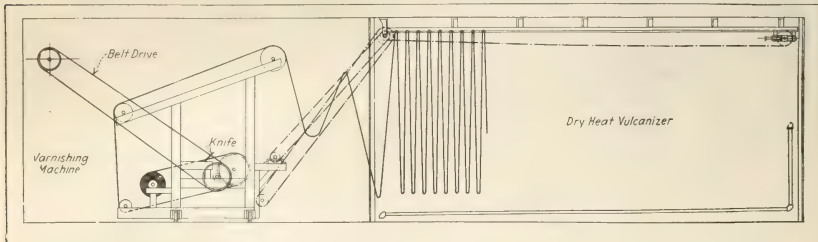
SINGLE TEXTURE FABRIC VARNISHING AND FESTOONING MACHINE AND DRY HEAT VULCANIZER.
